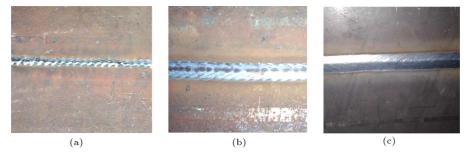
Three samples of welded booms using the designed welding manipulator: a) Very-high-speed welding, b) high-speed welding, and c) required-speed welding.
